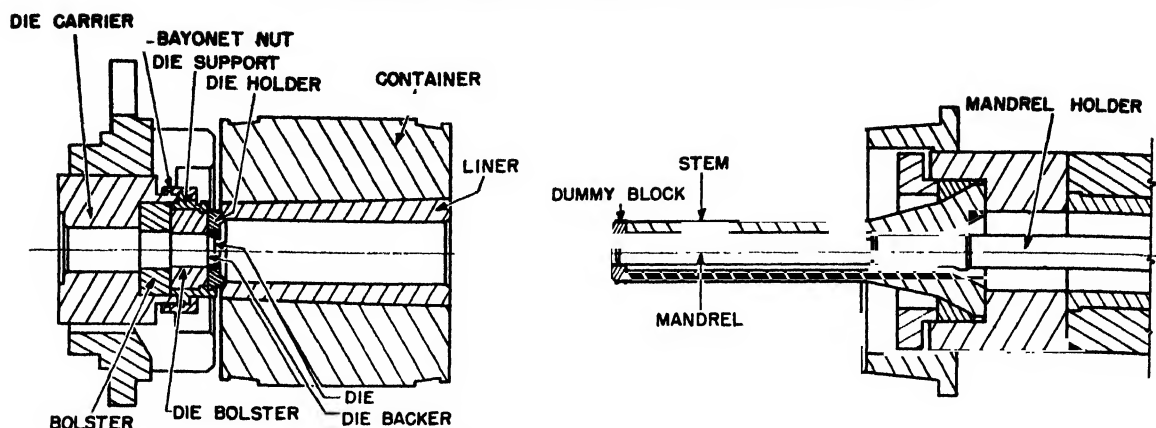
Tool assembly for the extrusion press shown schematically in Fig. 41-60.
